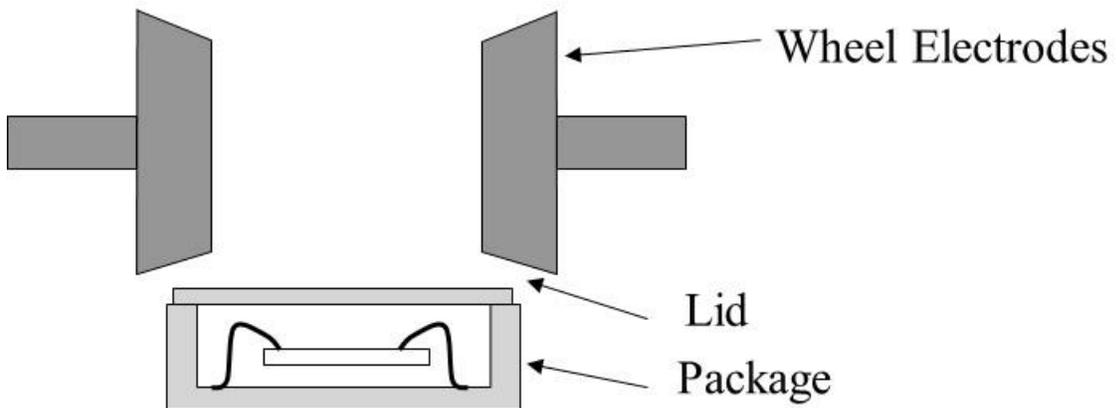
Schematic showing roll-spot welding used for sealing lids. The round wheel electrodes traverse along the length of the package making overlapping spots.
